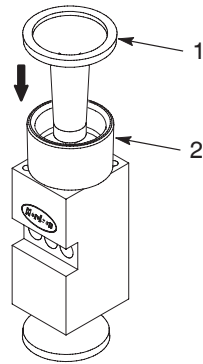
Using a base tool to push the needle-and-piston assembly into the module body
